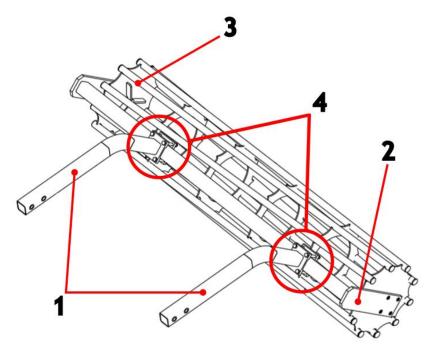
GAL-C arms connected to a tube-roller racket (1 - arms, 2 - tube-roller bracket, 3 - tube-roller, 4 - points of attachment of arms to bracket)
